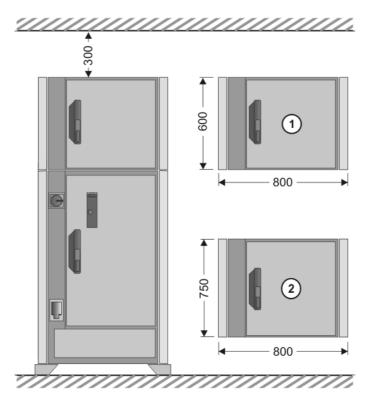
Minimum clearances with top-mounted / technology cabinet
